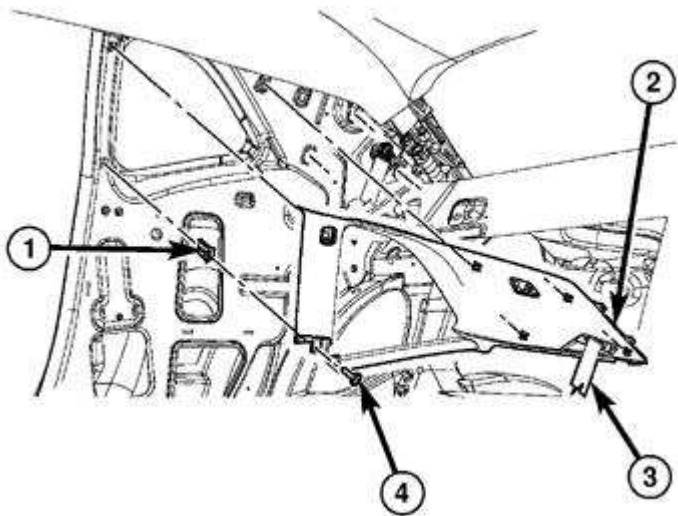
Removing/Installing Lower Quarter Trim Panel
